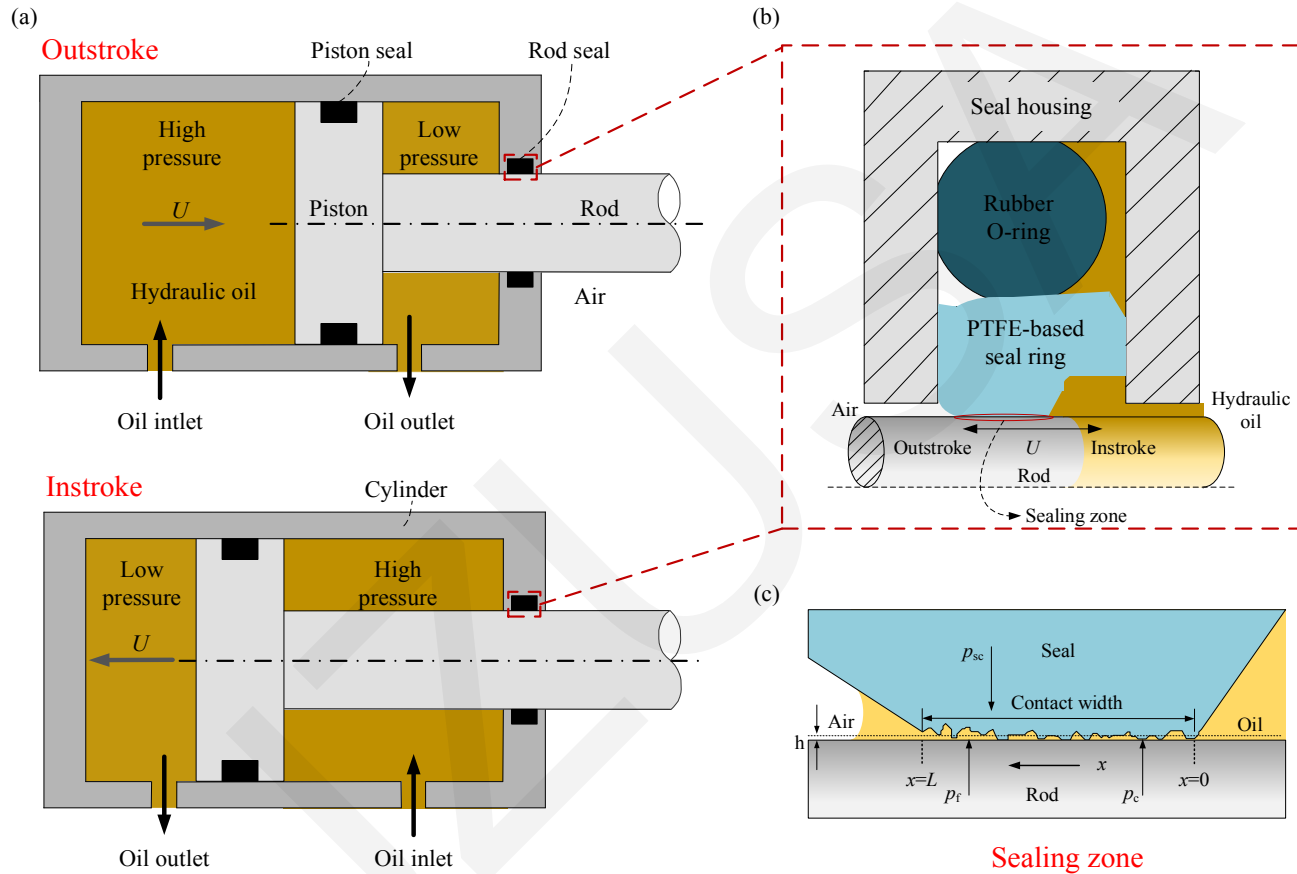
The geometrical model. (a) Hydraulic seals in a linear hydraulic actuator, (b) schematic of the step seal, and (c) details of the sealing zone
